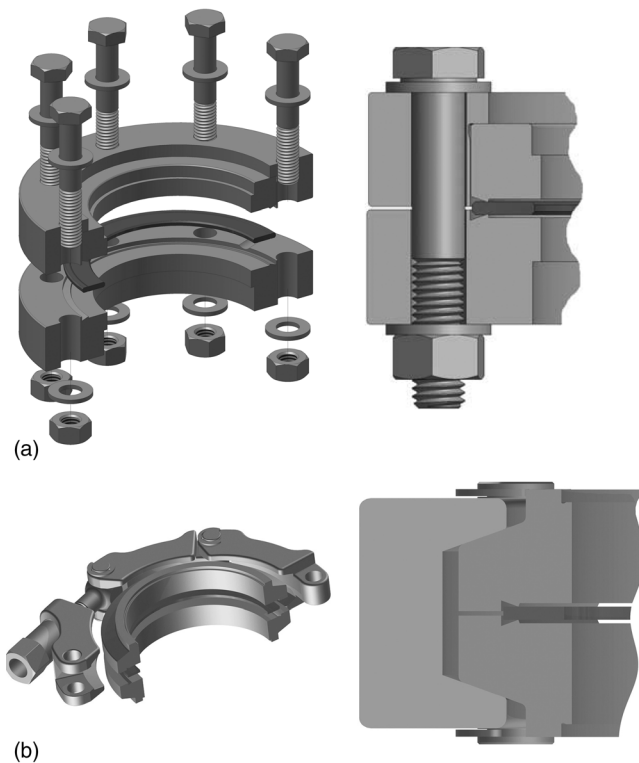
Schematic drawings of the CF flange system (a) and the QCF flange system for the simple, quick, and space-saving implementation of CF flanged joints (b).
